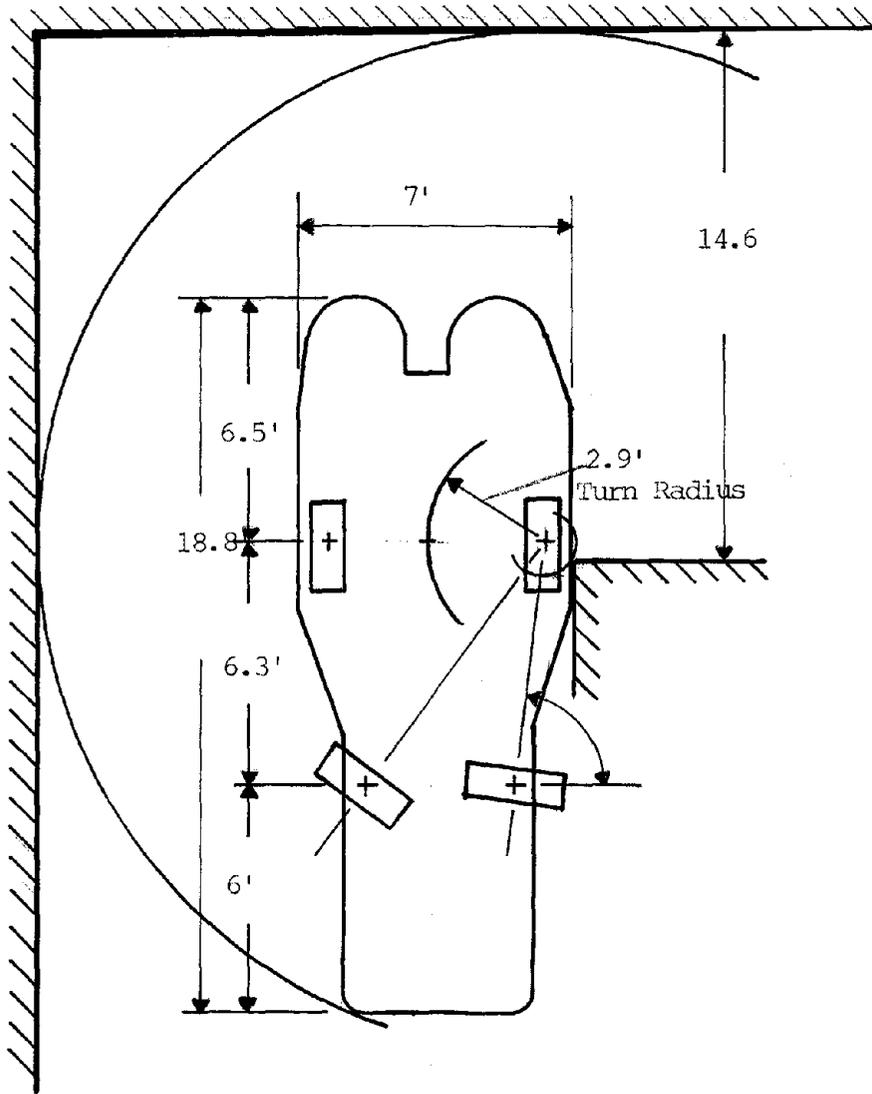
Smallest Turn Radius for Transfer Bolter - Dual Boom (New Chassis)
